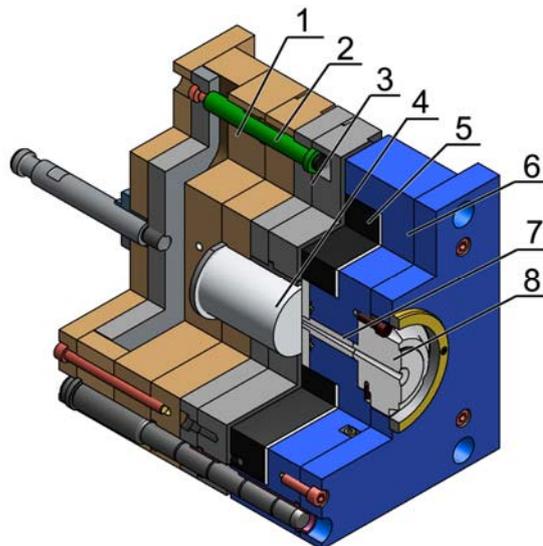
The structure of the special injection compression mold used for the measurements (1-movable platen, 2- pulling rod, 3- sliding plate, 4- core, 5- electromagnet, 6- stationary platen, 7- replaceable sprue element, 8-pneumatic nozzle insert)
